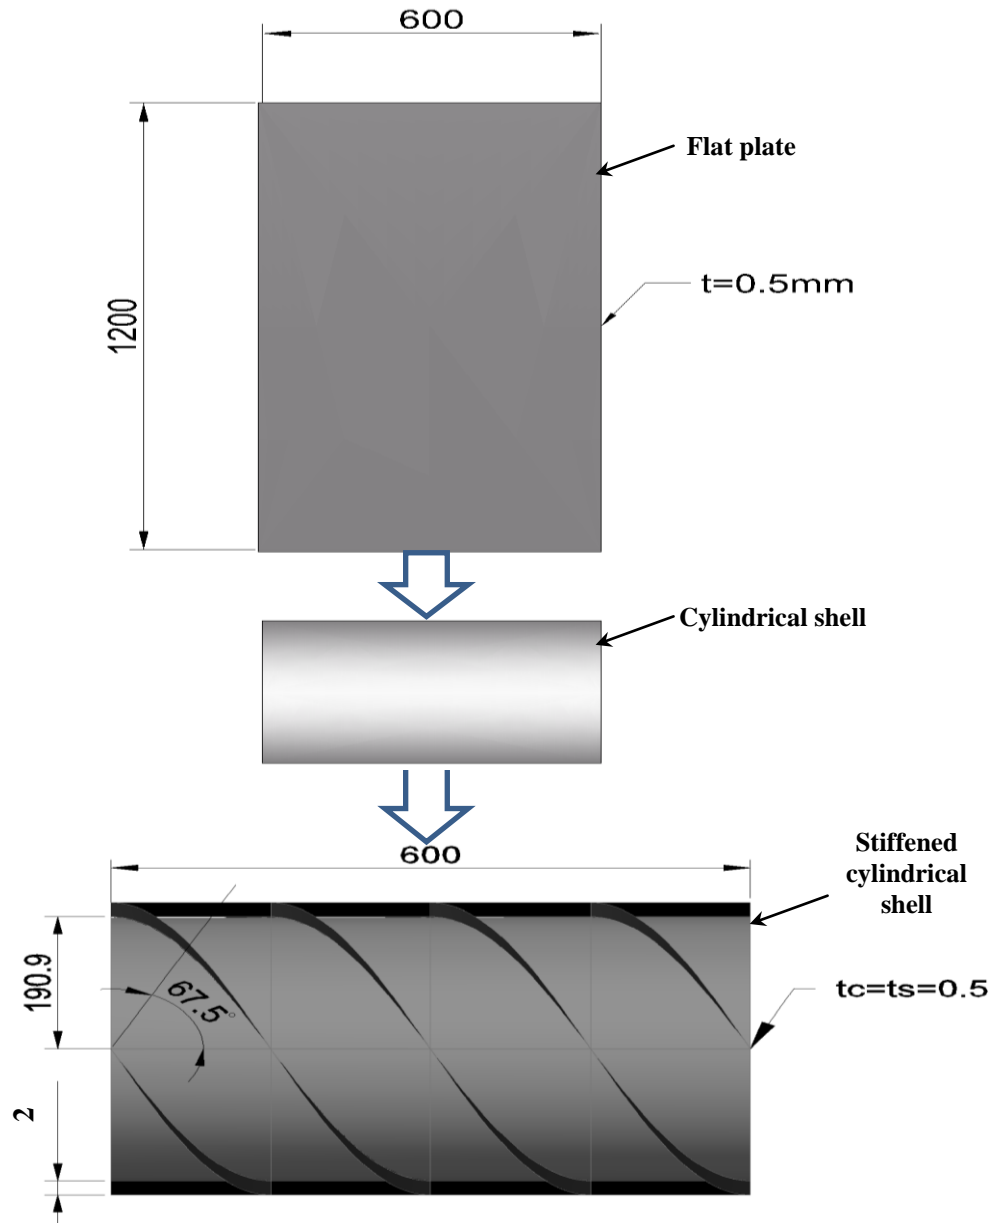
Dimensions and stages of manufacturing of stiffened cylindrical shell that used in vibration test (all dimensions in mm)
